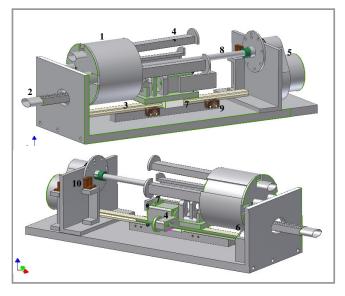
Dispensing mechanism (the top cover of the dispenser housing has been removed)
